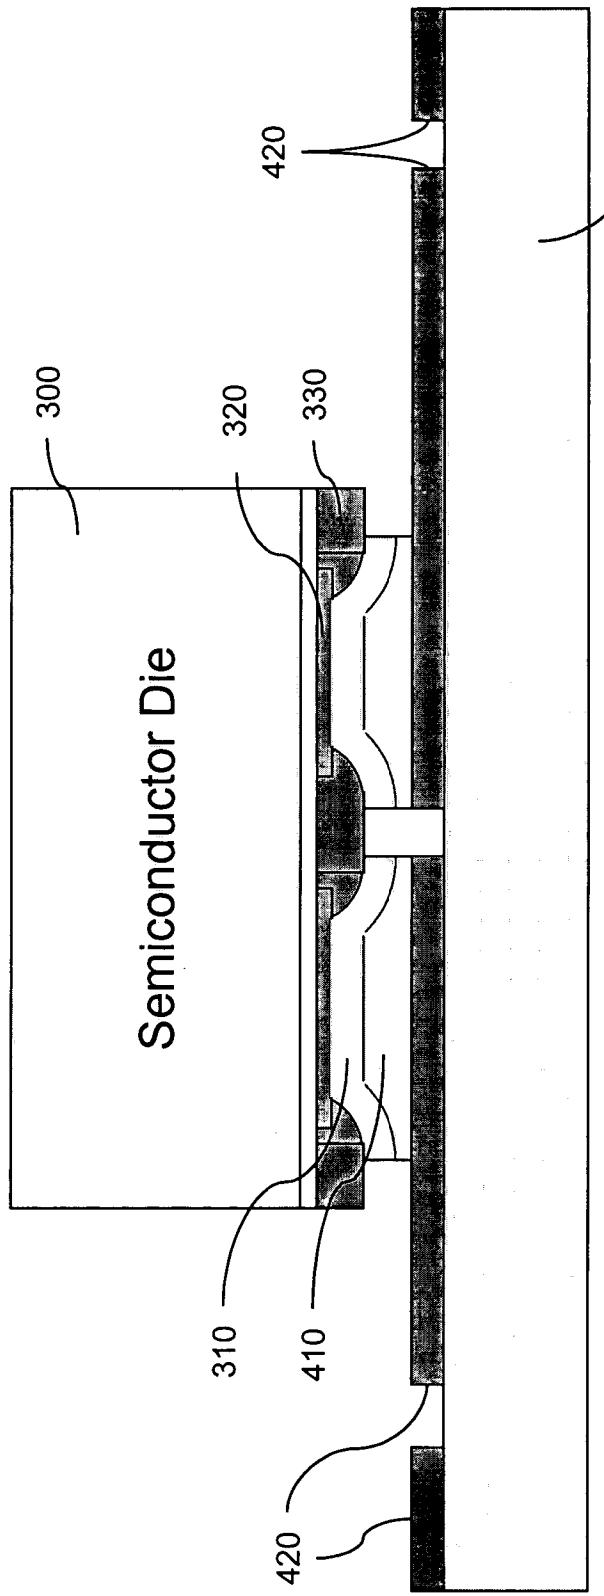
Illustration of Die with Solderable Electrical Contacts Mounted on Printed Circuit Board
